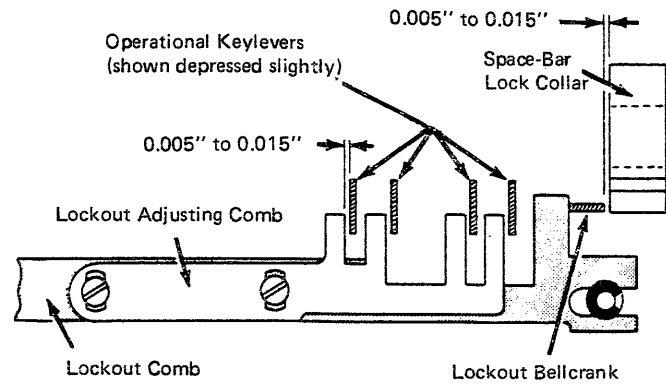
Adjusting Comb (Level 1), Keyboard Unlocked
